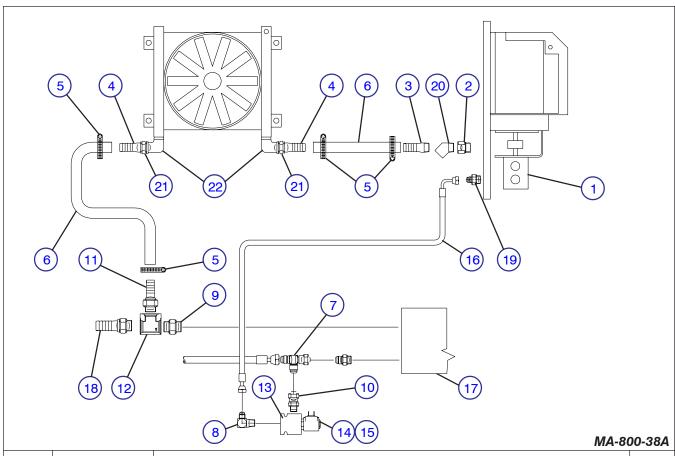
3500 WATT HYDRAULIC GENERATOR OPTION - Generator, Oil Cooler, and Mounting
